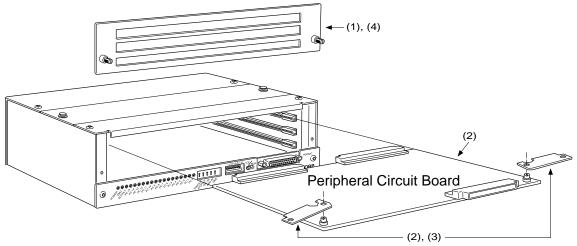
Installing method of the Peripheral Circuit Board
